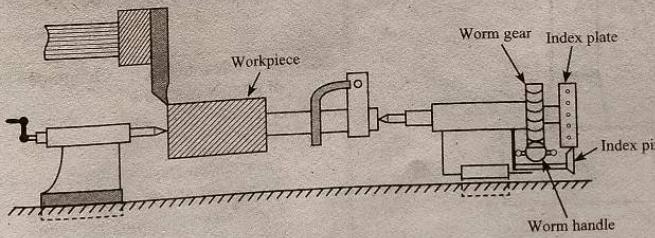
Cutting of Spline or Gear by Index Centre on Shaper
